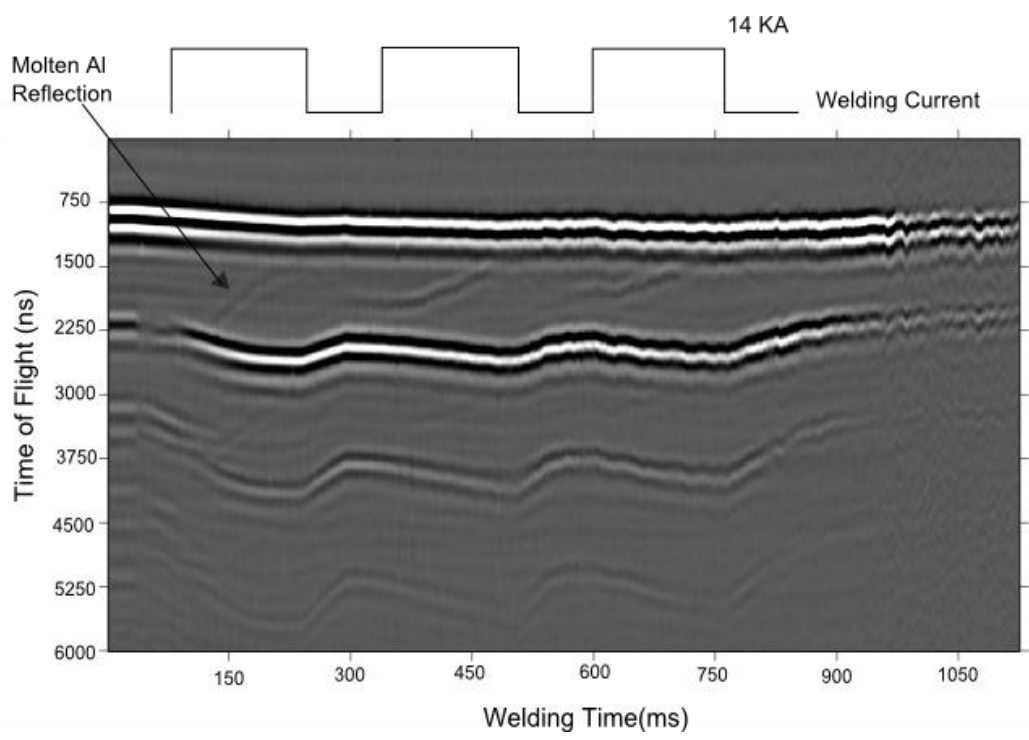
M-Scan acquired during welding using schedule shown in Table III-3
